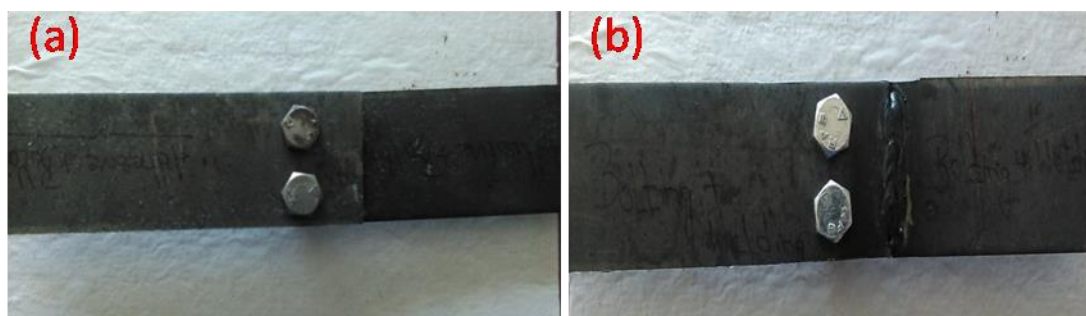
Photograph of hybrid joints (a) adhesive-bolted joint (b) bolted-welded joint
